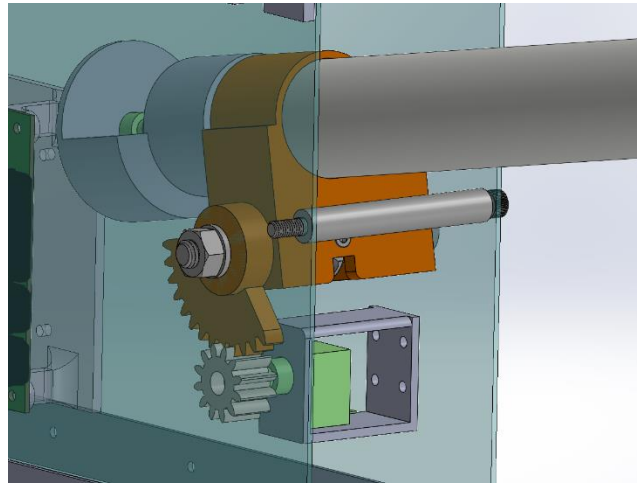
Overview of collective lever subassembly illustrating 3 to 1 encoder gear ratio and friction adjustment mechanism.
